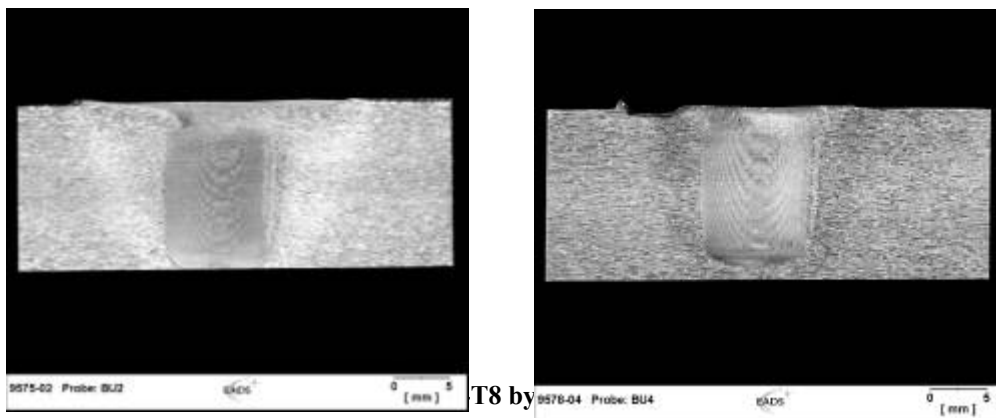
FSWelded 7449T4-FSW-T7 by standard (left) and DeltaN (right) tool
